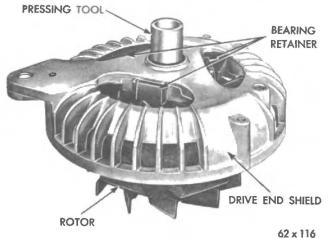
Installing drive end shield and bearing (Tool CA-3769).
